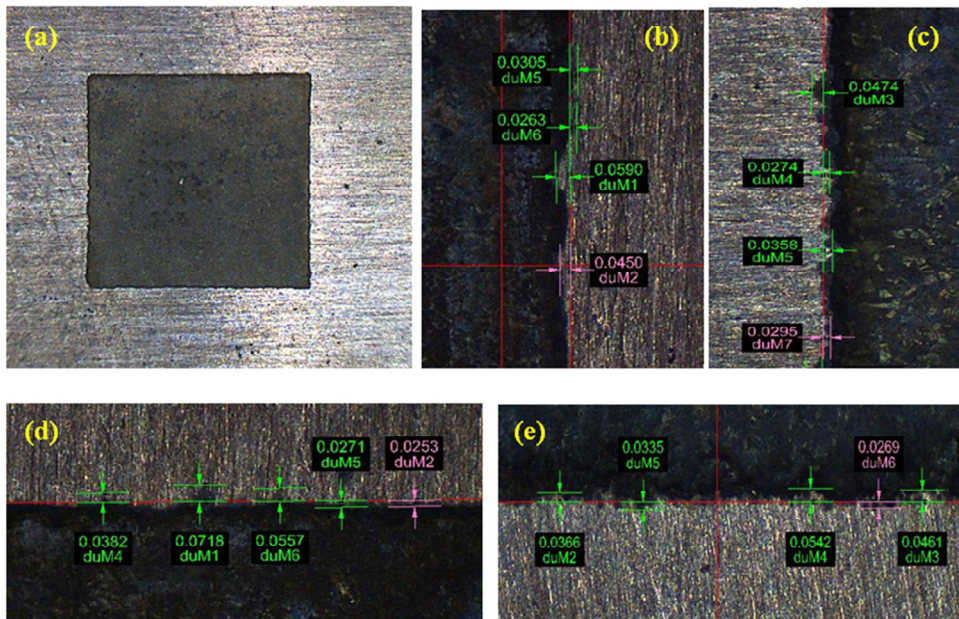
(a) Photochemically machined sample specimen.; (b), (c), (d), and (e) Edge deviation measurement for all four sides of a sample specimen.
